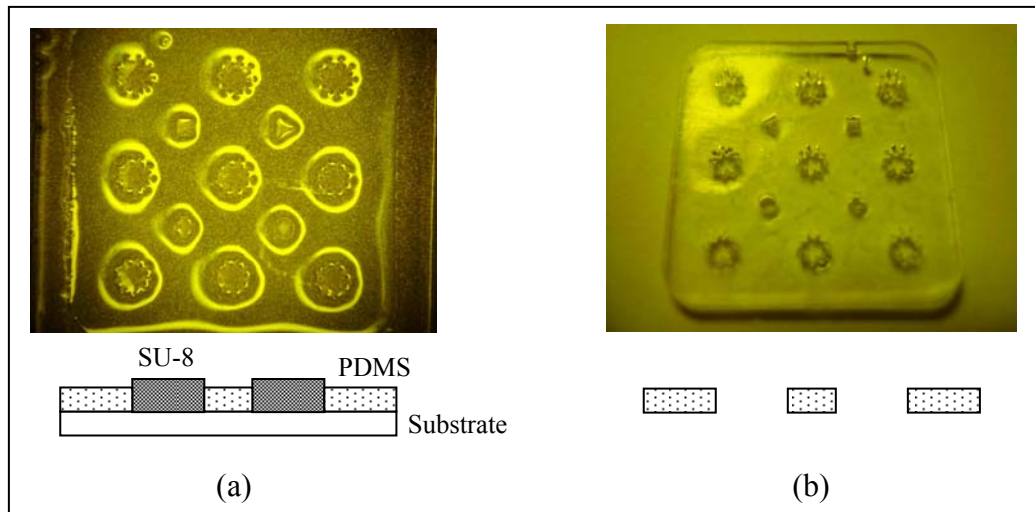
Molding of PDMS (a) PDMS loaded into the SU-8 master mold and (b) the PDMS mold removed from the mold.
